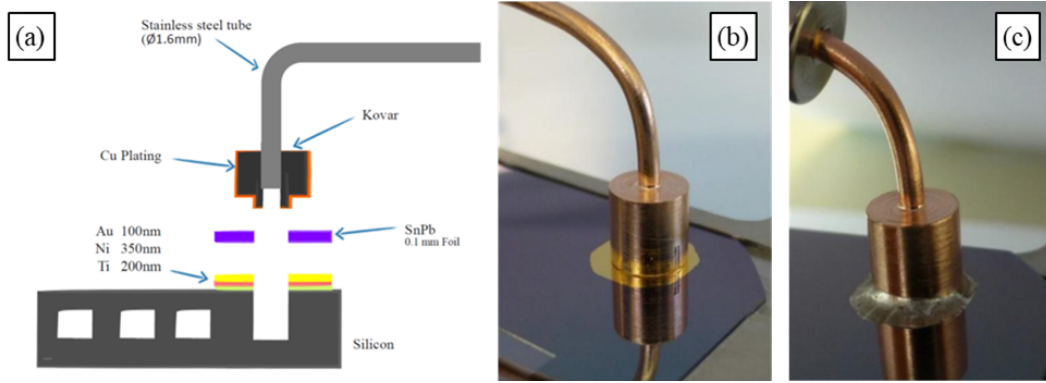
Kovar connectors of the NA62 GTK detector. (a) Schematic cross-section of the machined connector and before (b) and after (c) soldering. Four capillaries are welded to the Kovar connectors, which withstand 70 MPa of pressure. The picture is adapted from [131, 132].
